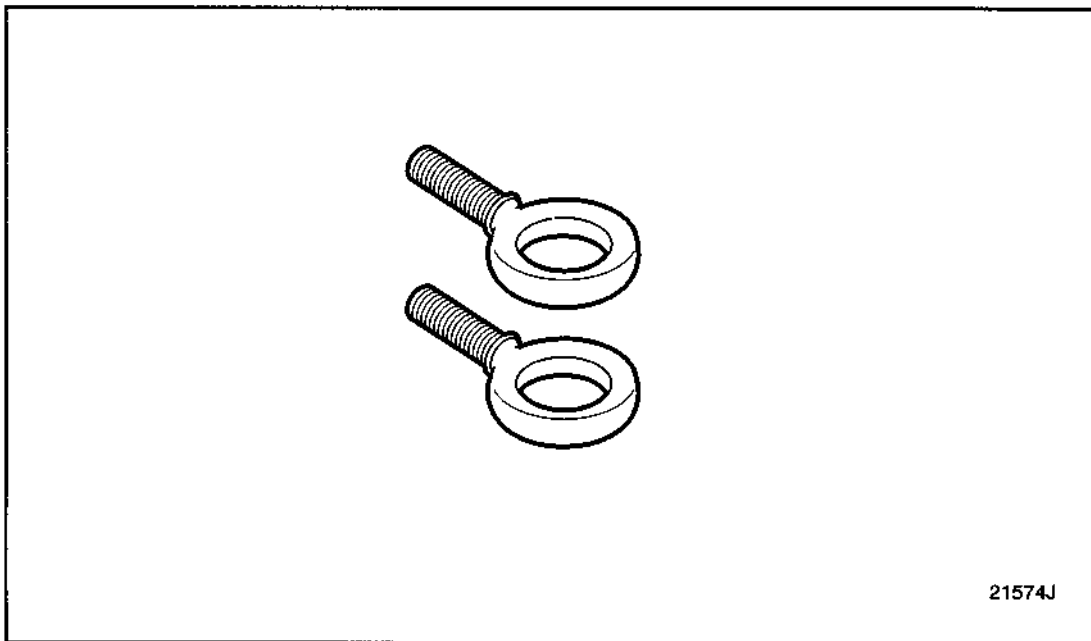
Block Lifting Eye Bolts,J 35595
